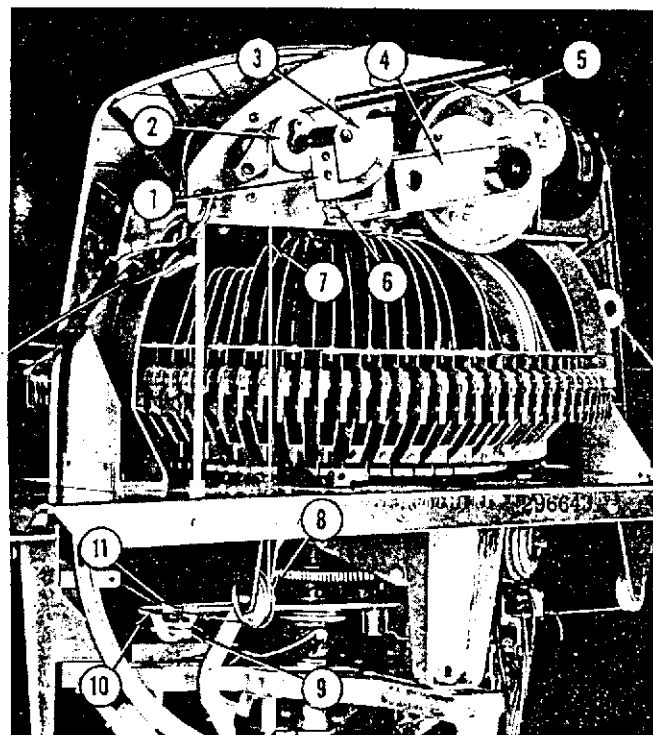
ADJUSTMENT, ACTUATING ARM AND CABLE TONE ARM AND TURNTABLE.
